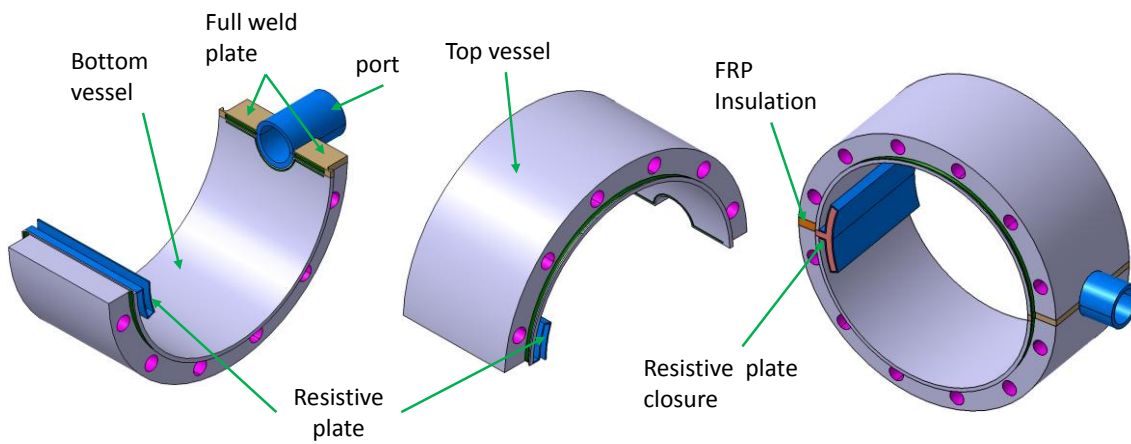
Assembly A: Sealing of top and bottom vessel at right and left cut
